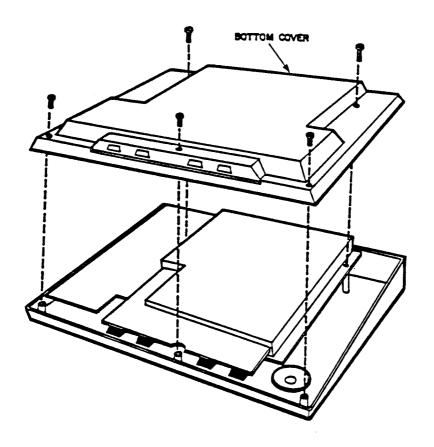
ATARI 800 Console, Bottom Cover Removal
